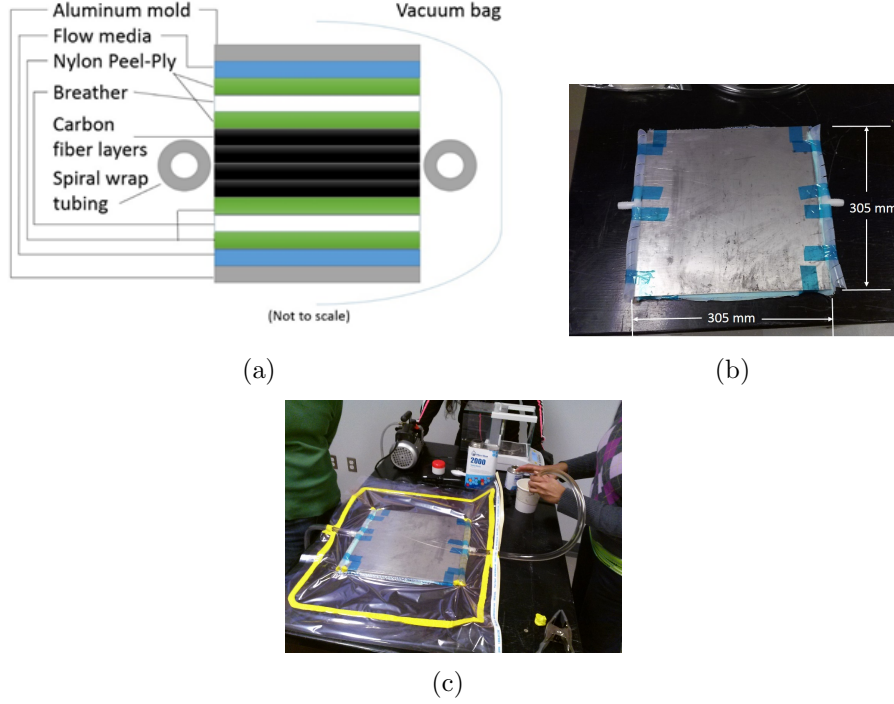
VARTM process: (a) Material Layup for the Mold; (b) Mold with Dry Fabric; (c) Vacuum Bag with Resin Infusion
